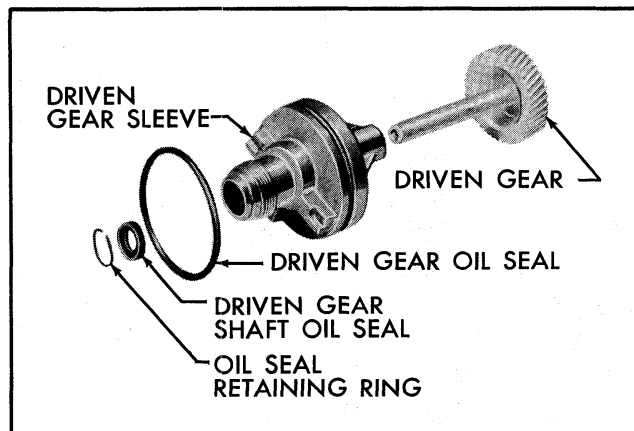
B-40 Speedometer Driven Gear and Sleeve Assembly - Exploded View
